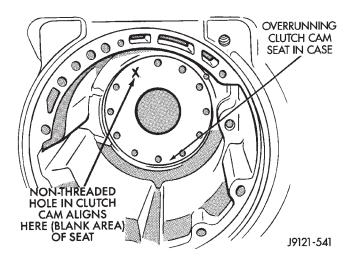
Location Of Blank Area In Clutch Cam Bolt
